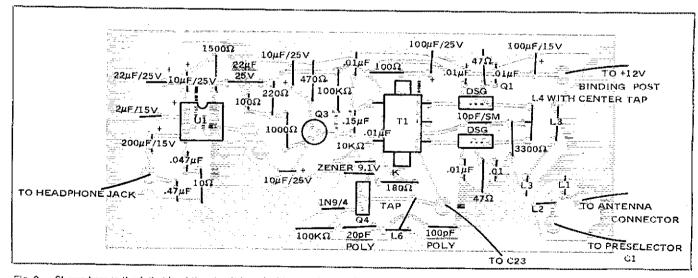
Shown here is the foil side of the circuit board with parts layout. Grey areas represent unetched copper. Drawing is to scale.
